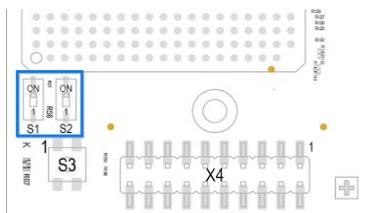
Position of DIP switches S1 and S2 on LGA adapter board
